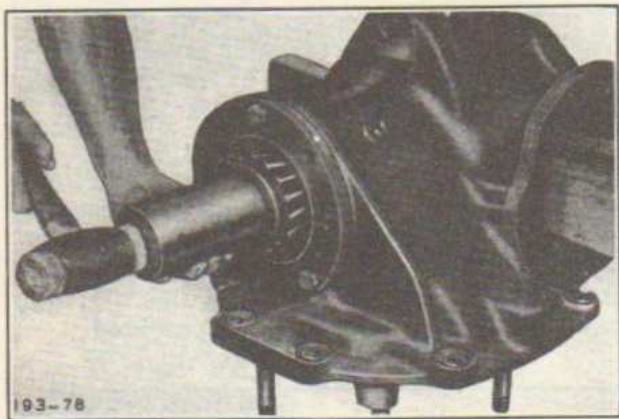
Installing Outer Spur Pinion Shaft Bearing
